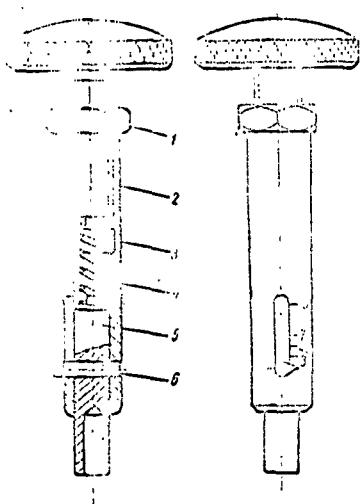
Dynamometer for fitting inner ball bearing rings on the necks of rotors. 1) nut; 2) plunger; 3) body; 4) spring; 5) punch; 6) pin.
